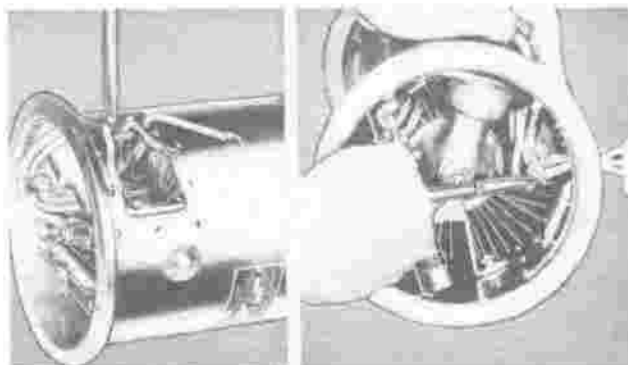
(Sheet 4 of 6)—Heater Assembly
